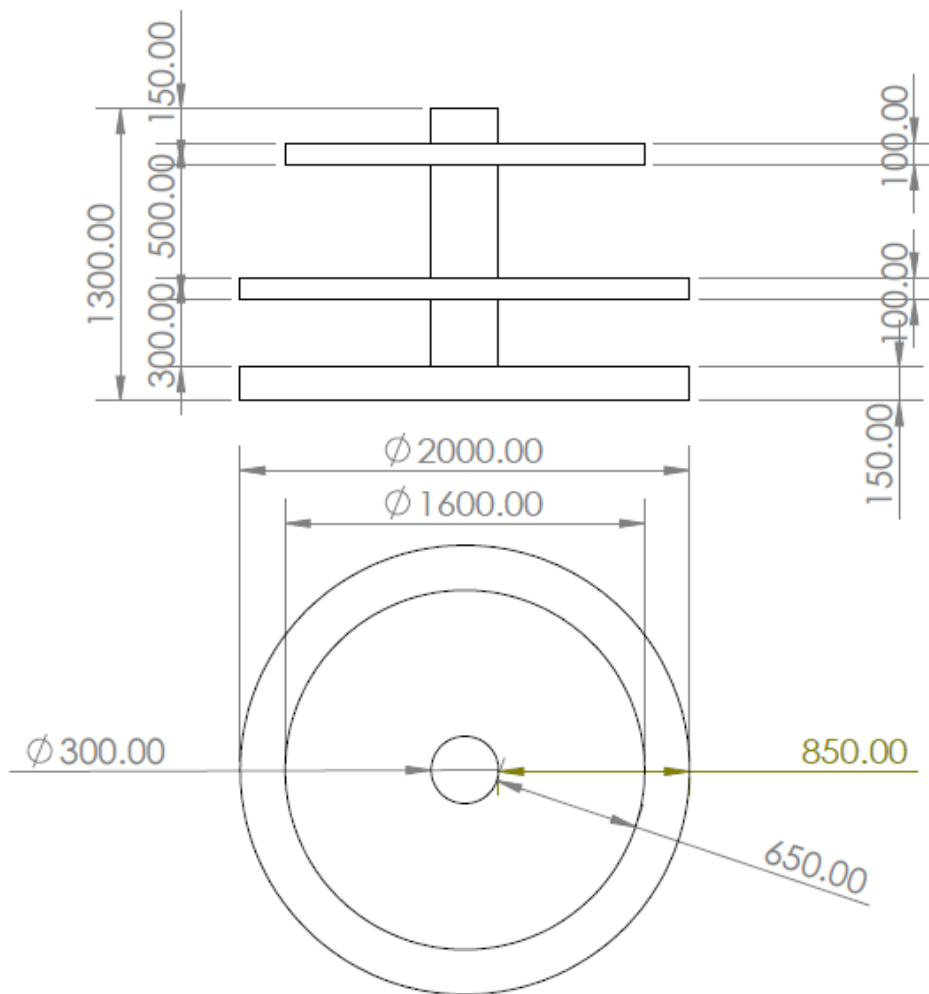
Technical drawing of the terraced concept made with Solidworks
